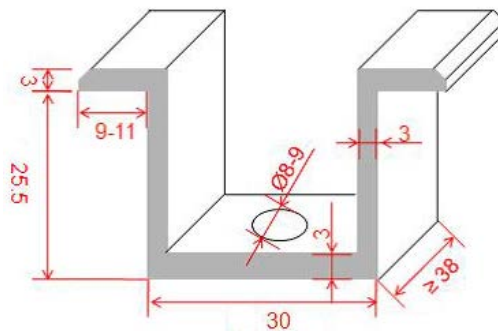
3 Fixture used between modules (X= thickness of module frame)
